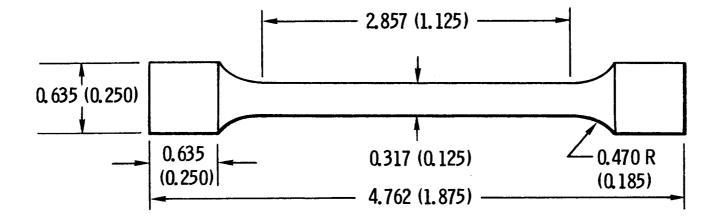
Tensile Specimen Geometry. Dimensions in cm (in.).
